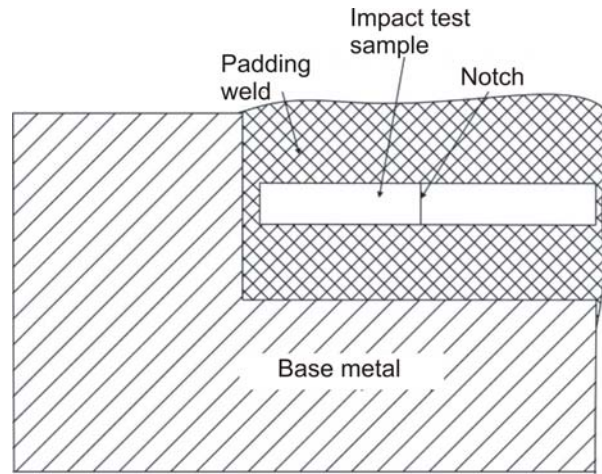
The schematic diagram of the part with the pad welding and the method of cutting out impact samples
